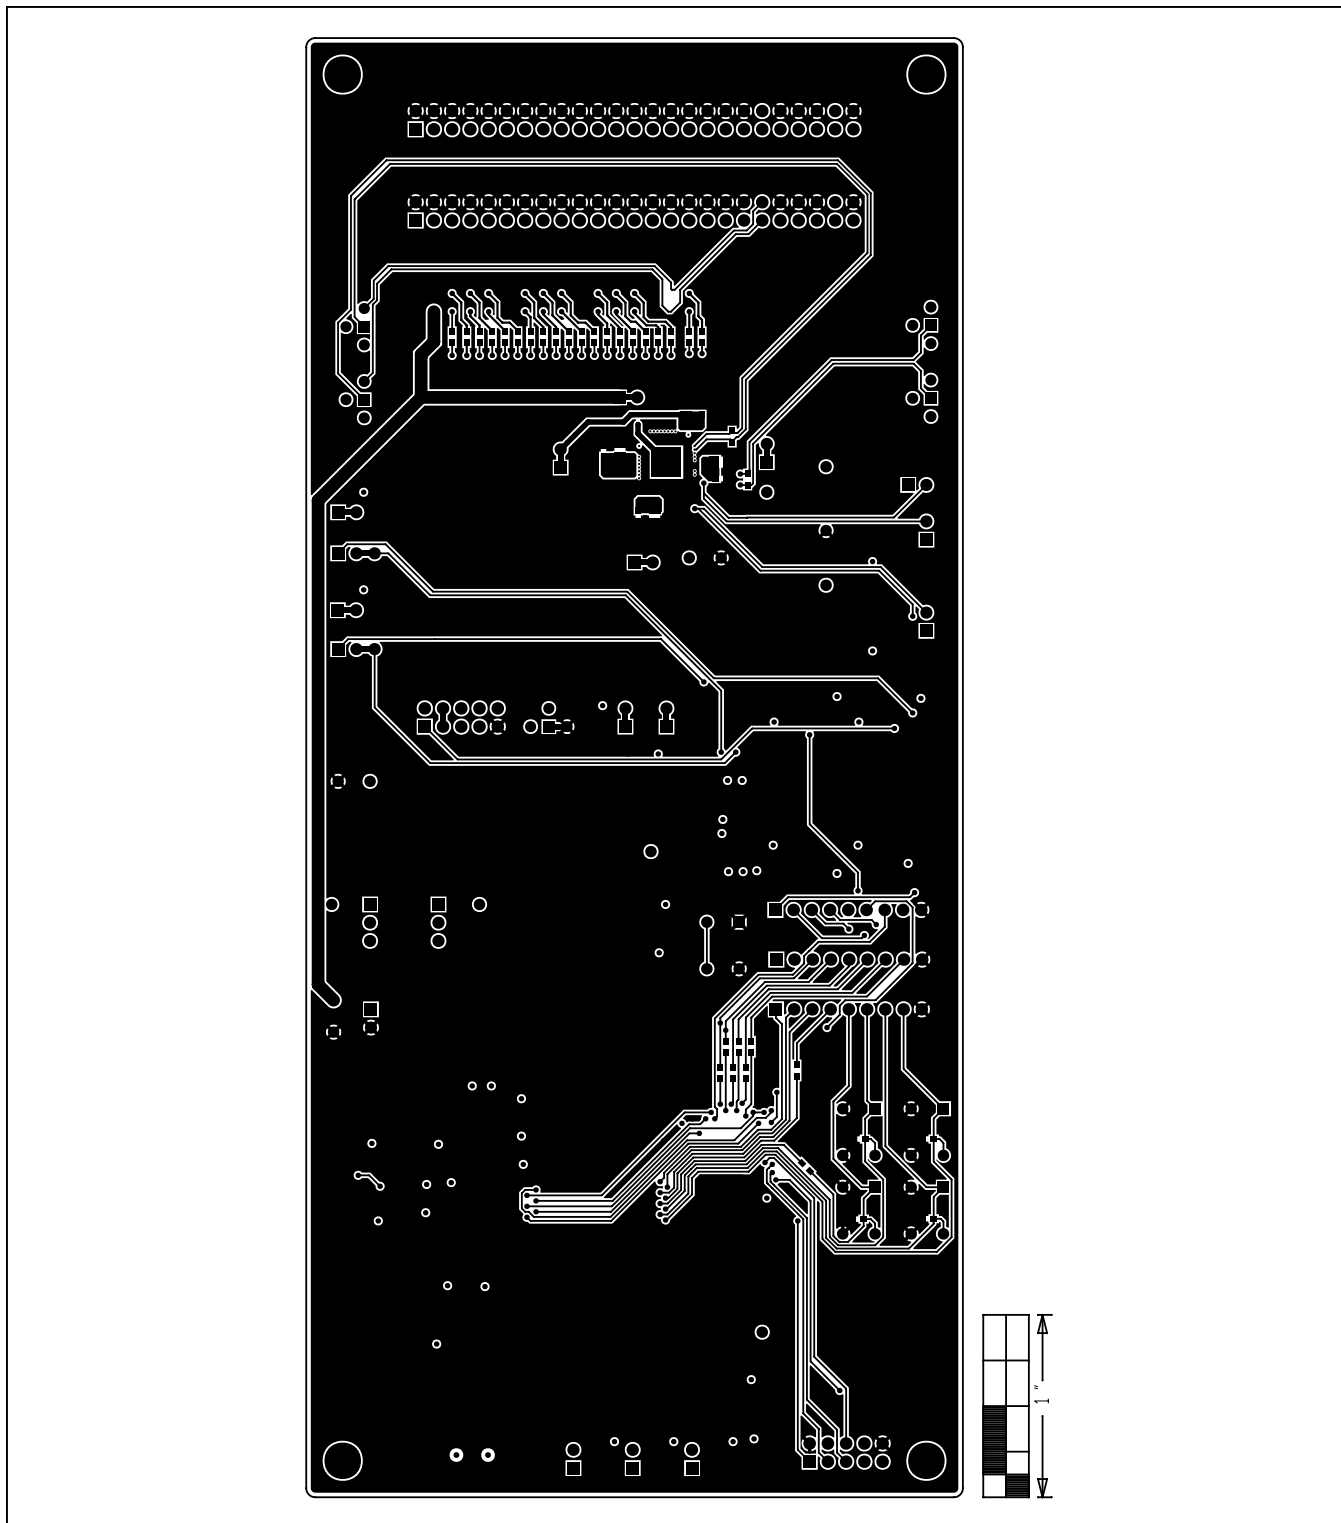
MAX11301 EV Kit PCB Layout—Solder Side
